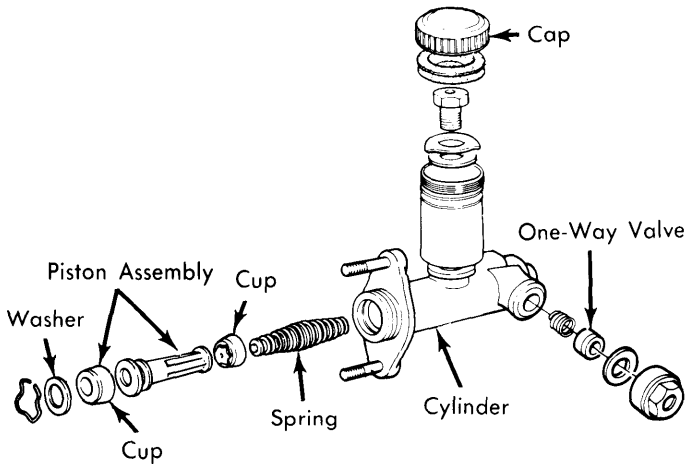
Exploded View of Clutch Master Cylinder Assembly with Detail of One-Way Valve Used on Models Equipped with 2300 cc Engine
